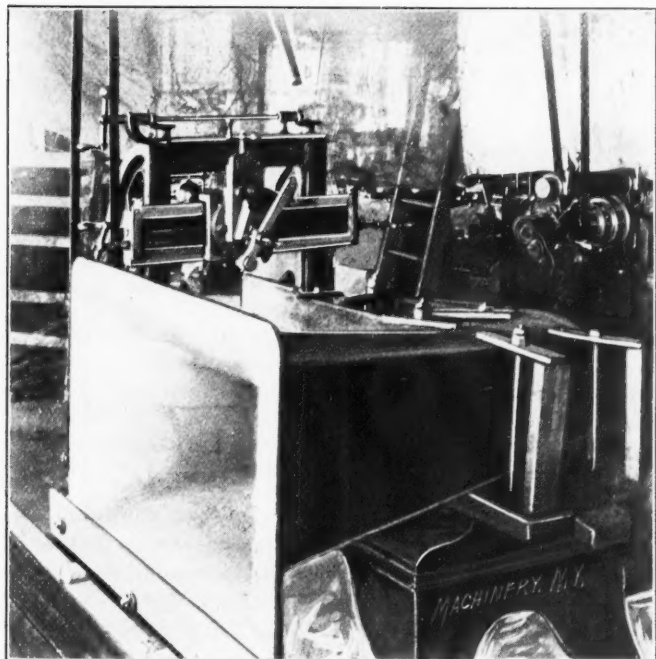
Method of Planing a Large Casting on a Small Planer.
